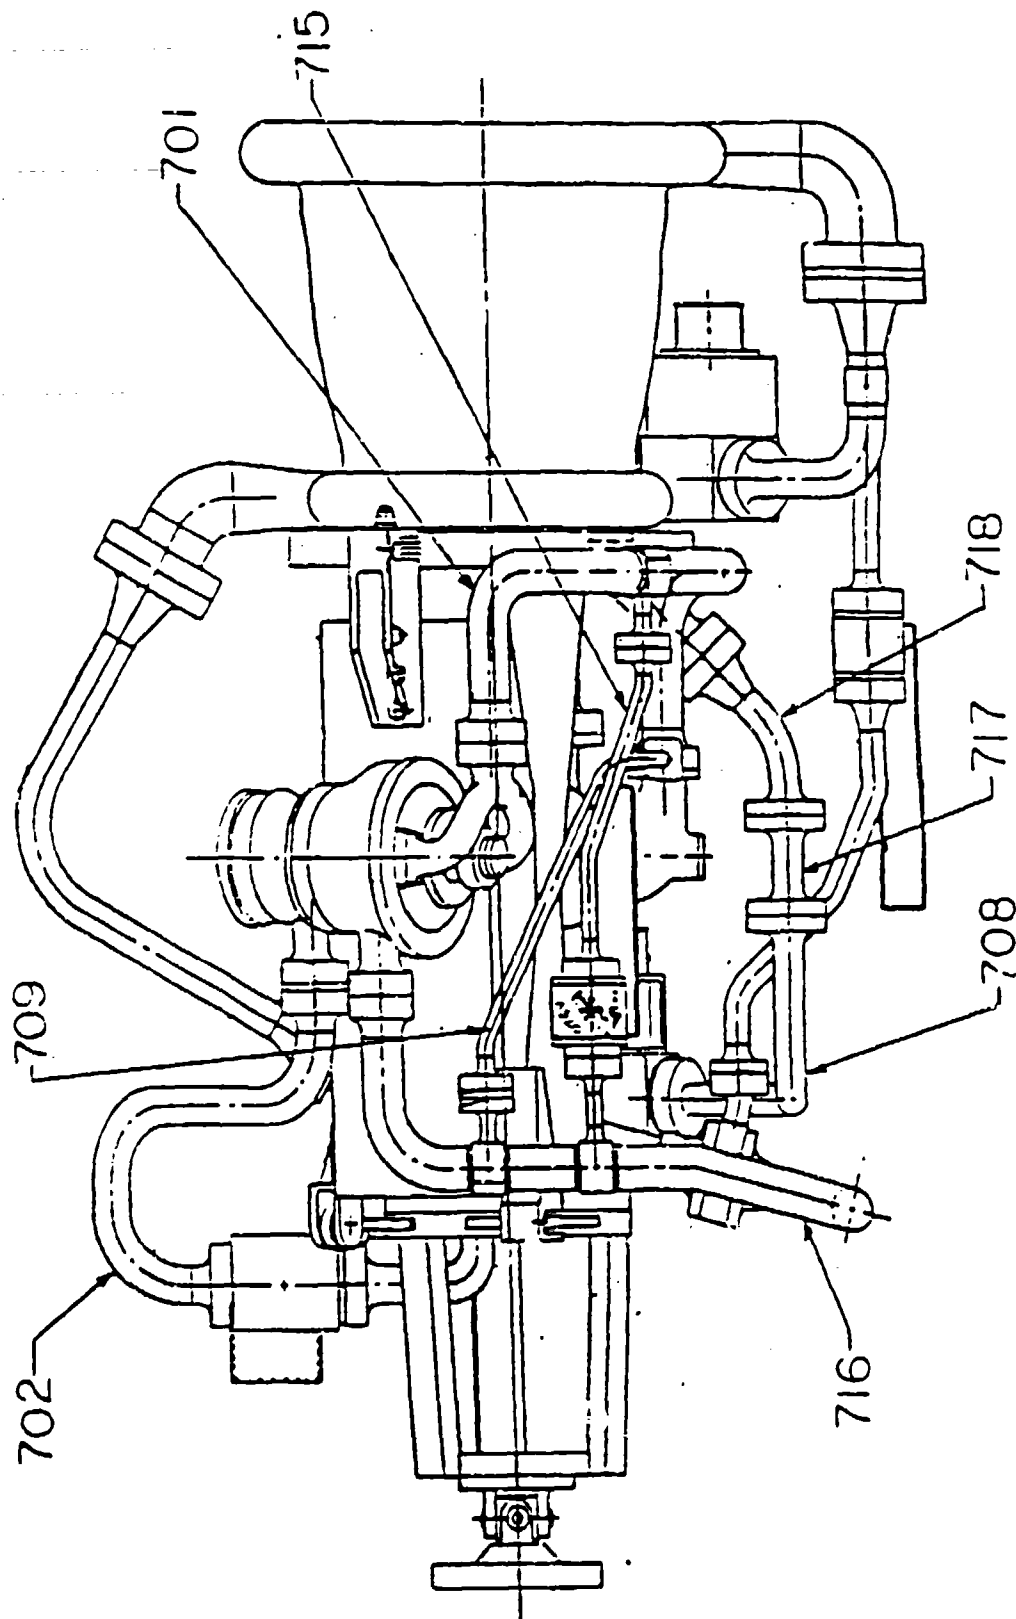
RS-44 DUCT ASSEMBLY LOCATIONS
